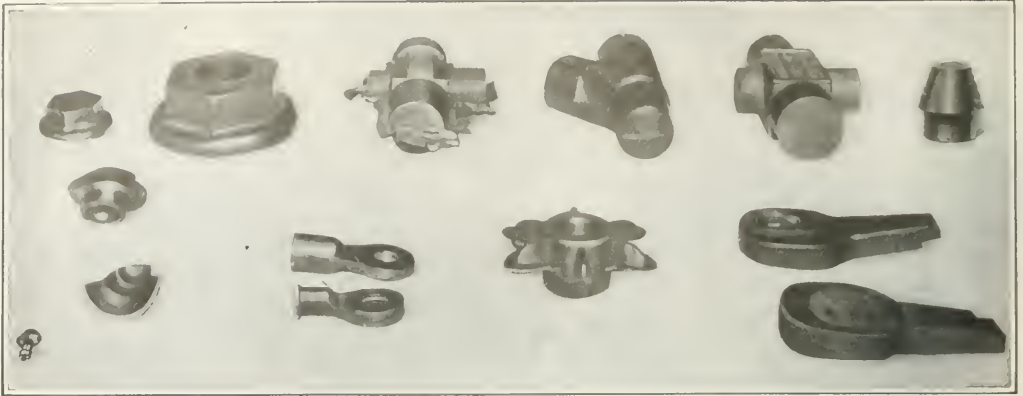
Die-pressed Castings for Use on Oxy-acetylene Welding Equipments, Phonographs, Electrical Apparatus, Watches, etc.
